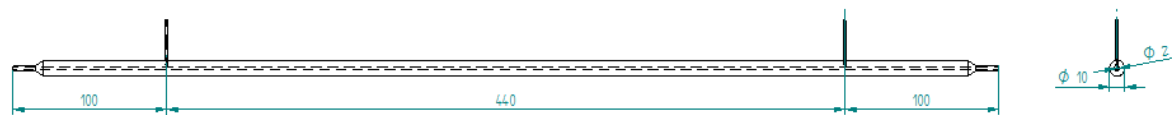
Sketch of the 2 mm inner diameter circular test section. Dimensions are in mm.
